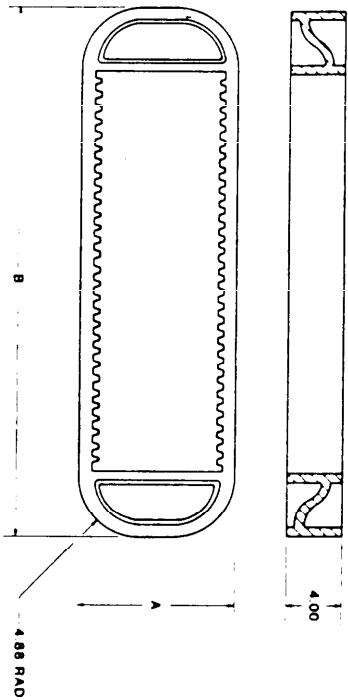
B65. Multi-cable penetrator (Type TW) sleeve installation.
